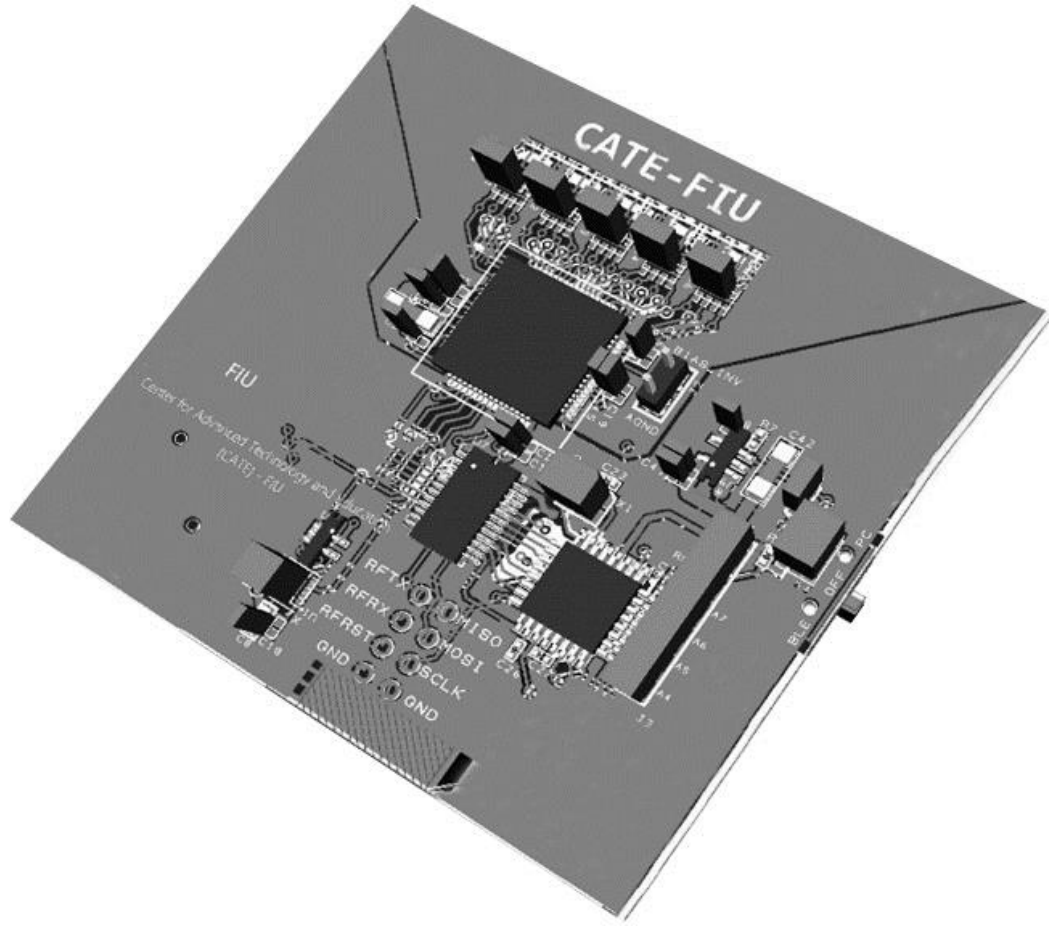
PCB of suggested EEG recording system's front end stimulated using Altium designer software
